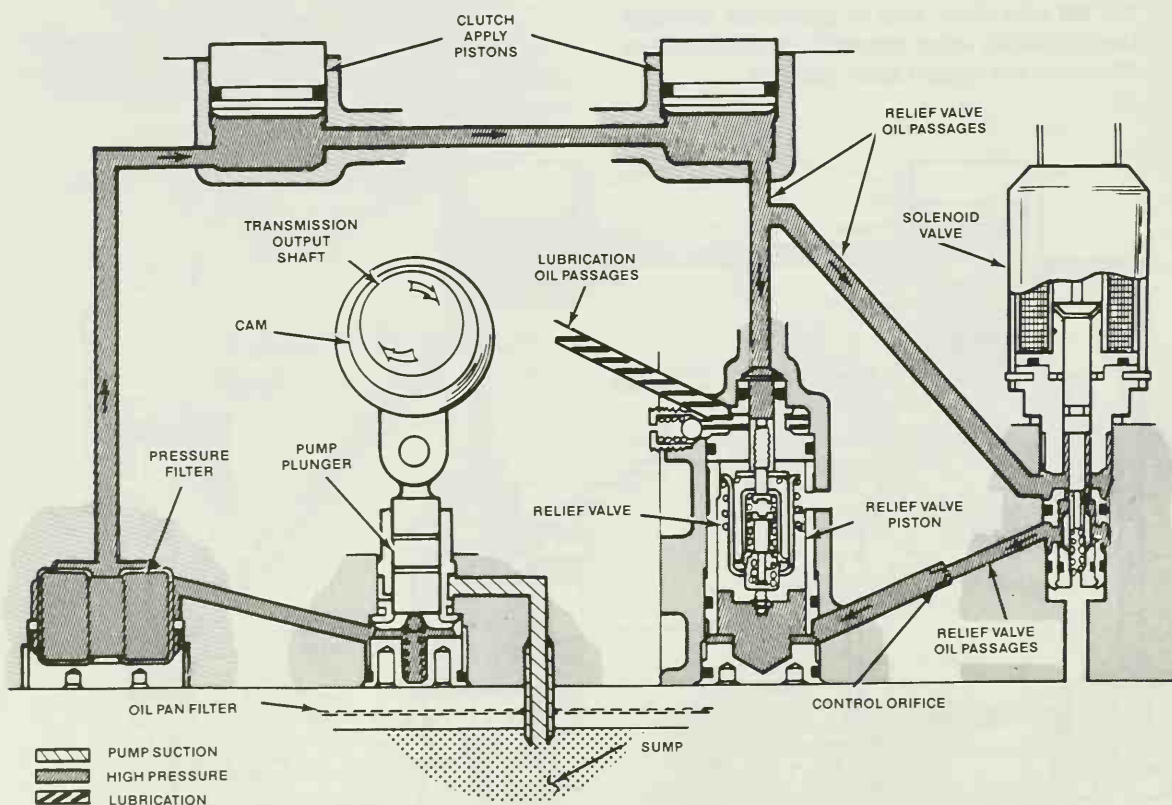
Flow through the hydraulic system when the overdrive is engaged. (American Motors Corporation)
